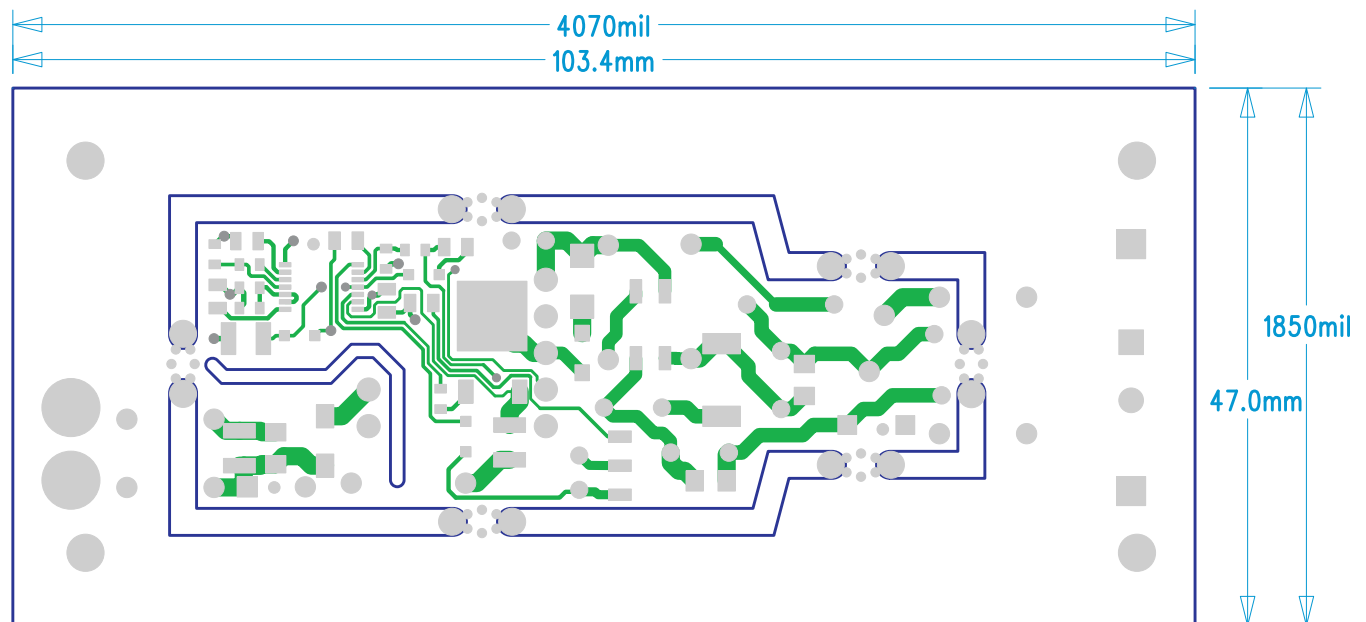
LM3447-A19-120VEVM Bottom Layer Copper (bottom view)
